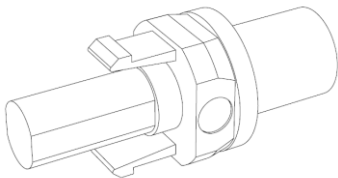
Design, negative (-) chassis connector, type Phoenix 1805177
